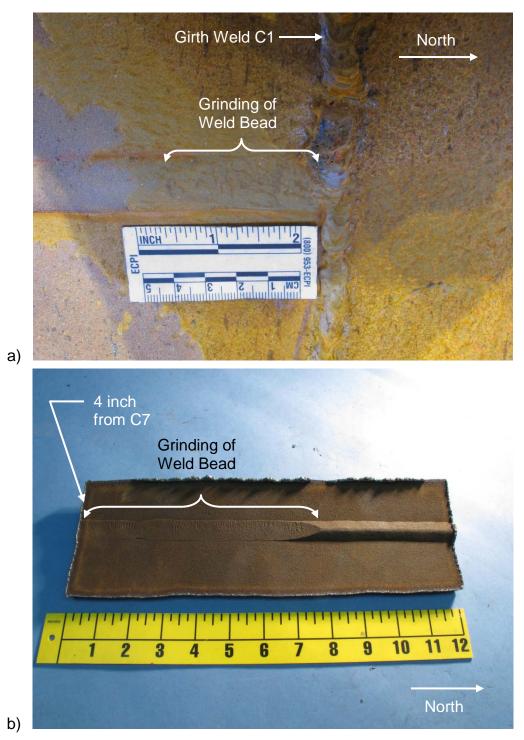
a) Inner weld bead on the long joint south of pup 1. The weld bead was ground over 1.75 inch. The photograph was taken after grit blasting and magnetic particle inspection;b) Inner weld bead on the long joint north of pup 6. The weld bead was ground over approximately 12 inch. The photograph was taken in the laboratory after the section of pipe was removed using a plasma cutter.
